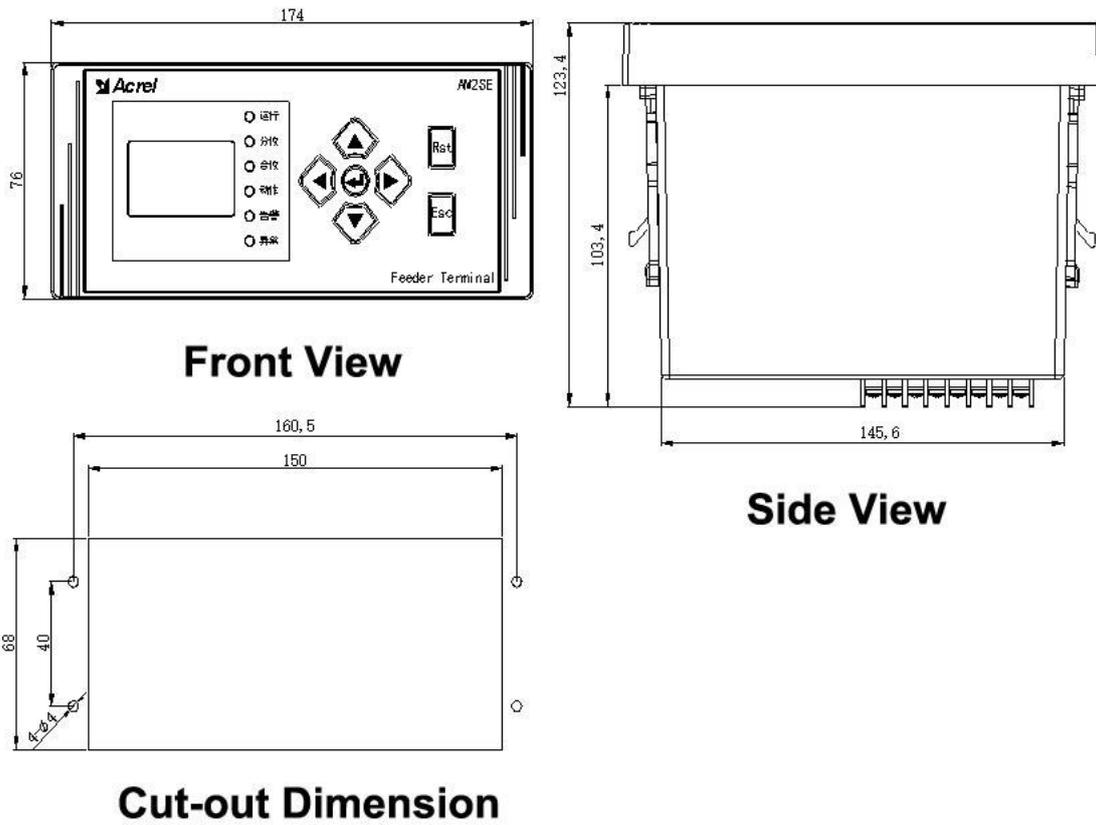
AM2SE-H Dimensions and cut-out dimensions
